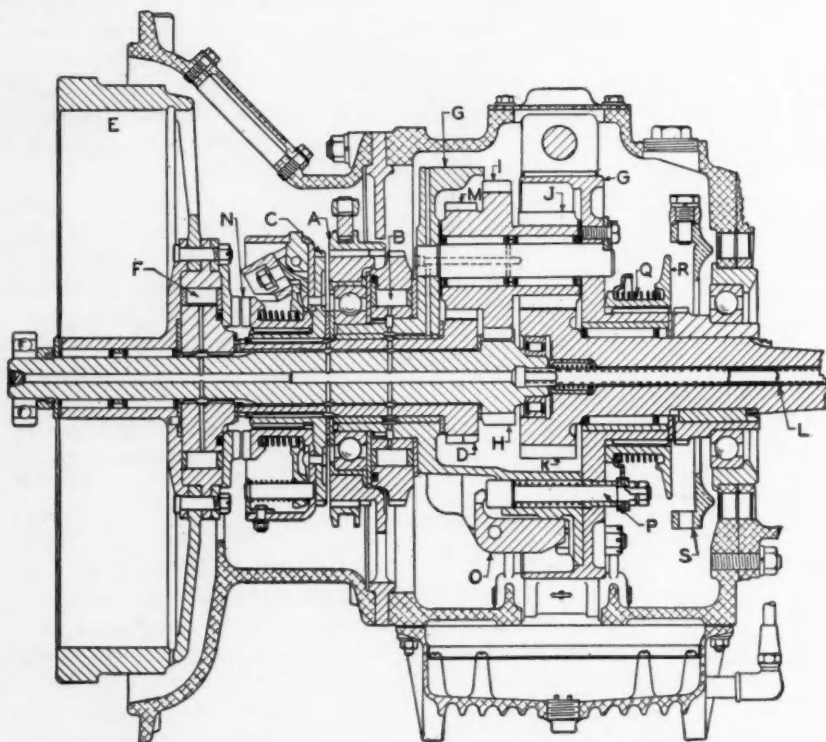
Longitudinal Section of Yellow Coach Automatic Shifting Transmission (Monodrive Patents)
